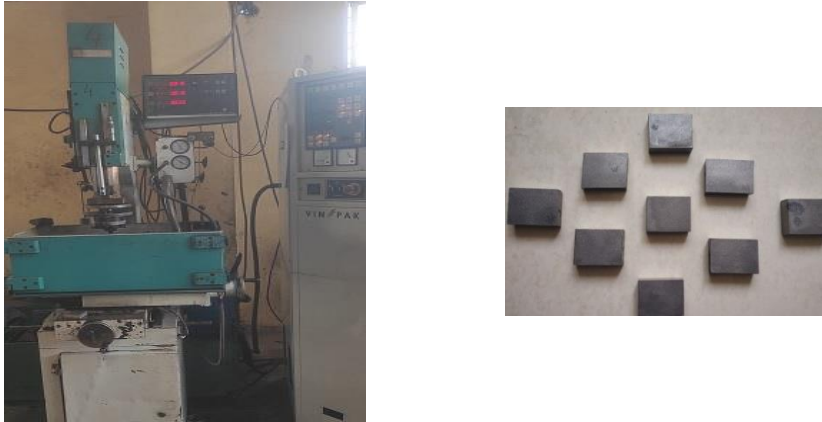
EDM setup and Machined plates ( Ni-Ti Alloy)
